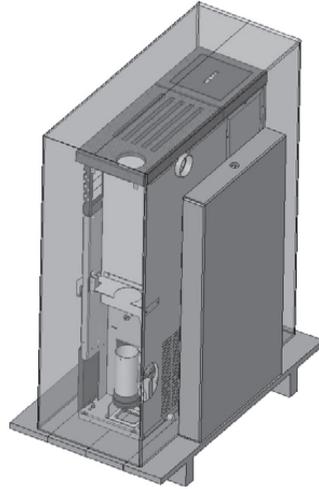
STOVE PACKAGING + SIDE AND FRONT PANELS
